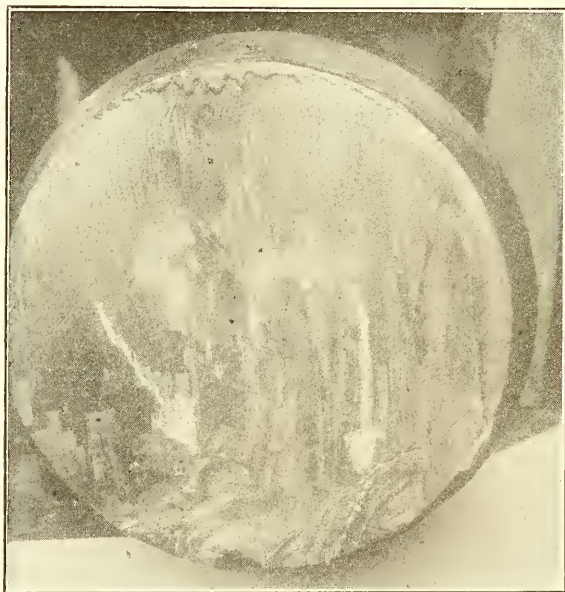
A 12-In. Shaft Cut with a Gas Torch.
